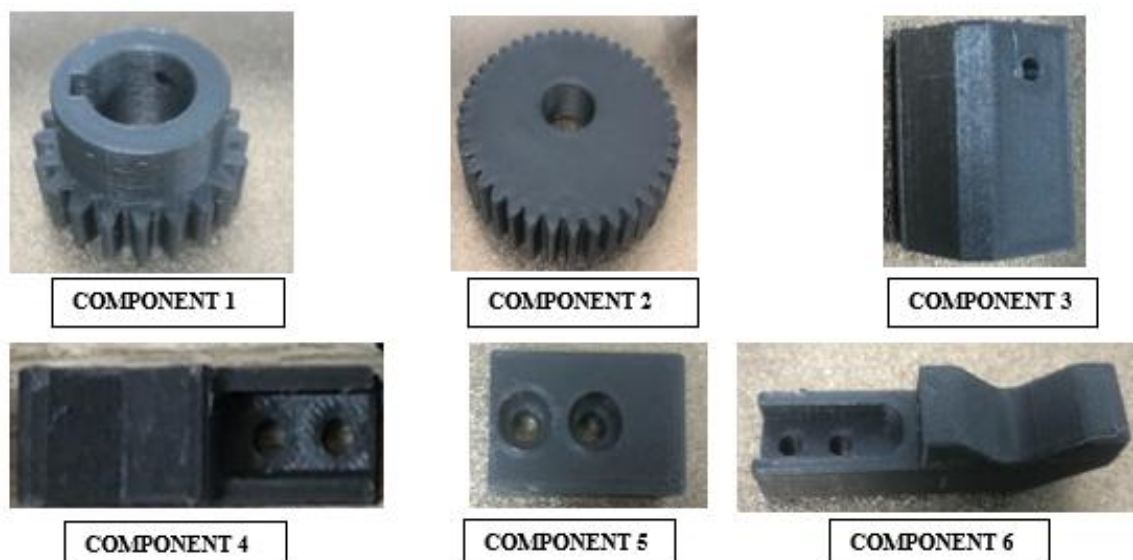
Details of the *shaft inspection machine* equipment printed by composite material based on PA6/PA11 blend.
